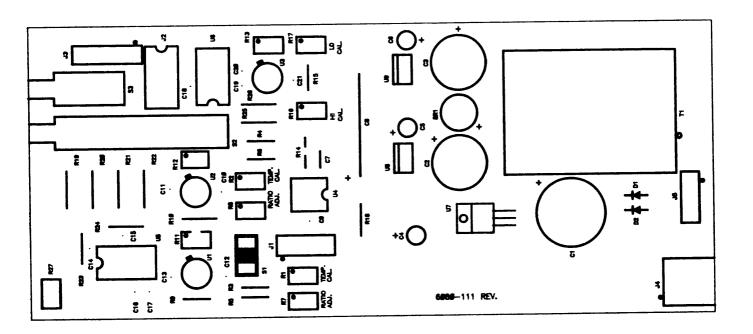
FLOW INDICATOR PC BOARD COMPONENT LAYOUT.
